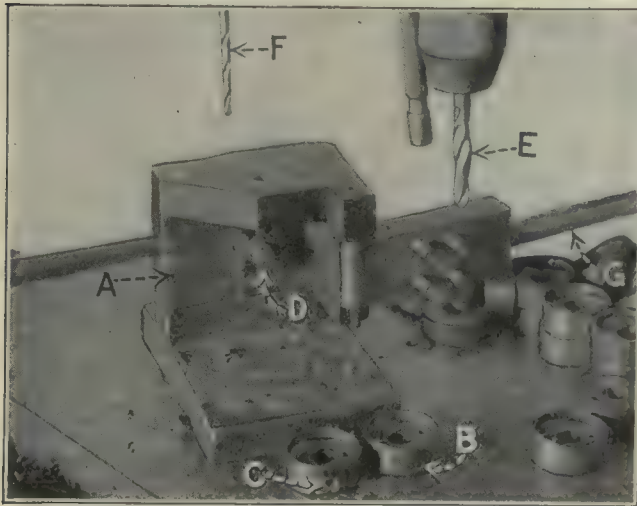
HAND HELD JIG FOR SIMPLE PARTS
